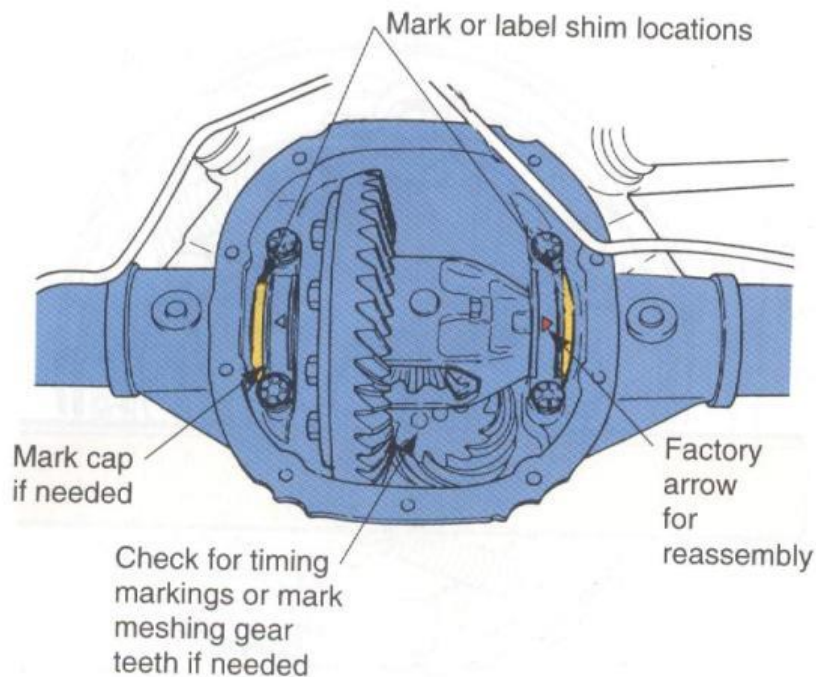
As you disassemble the differential, make sure you check marks and mark critical components. Most parts must be installed in the same location during reassembly.
